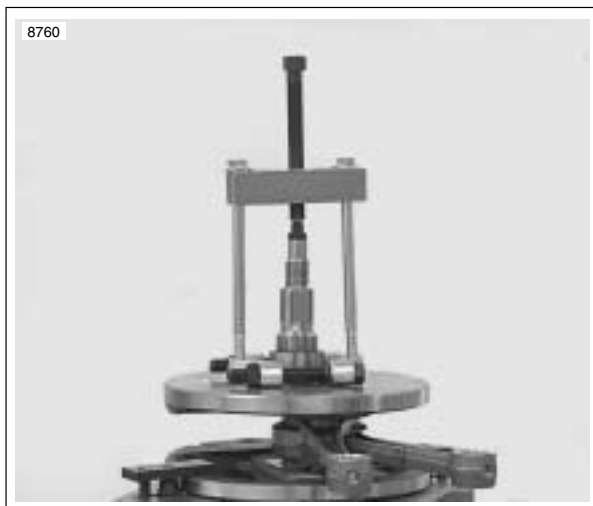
Removing Sprocket Shaft Inner Bearing Race
